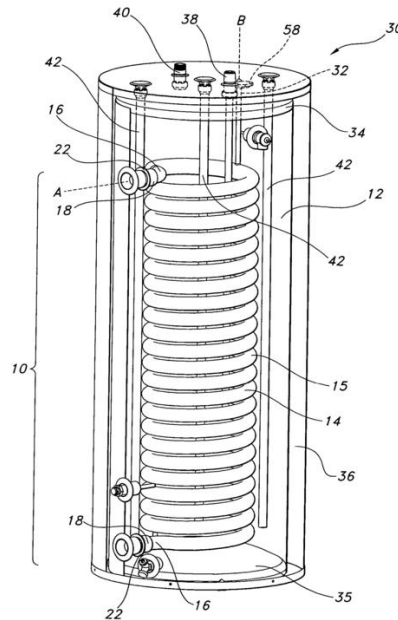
TANK GEOMETRY WITH OPEN VIEW OF COIL
